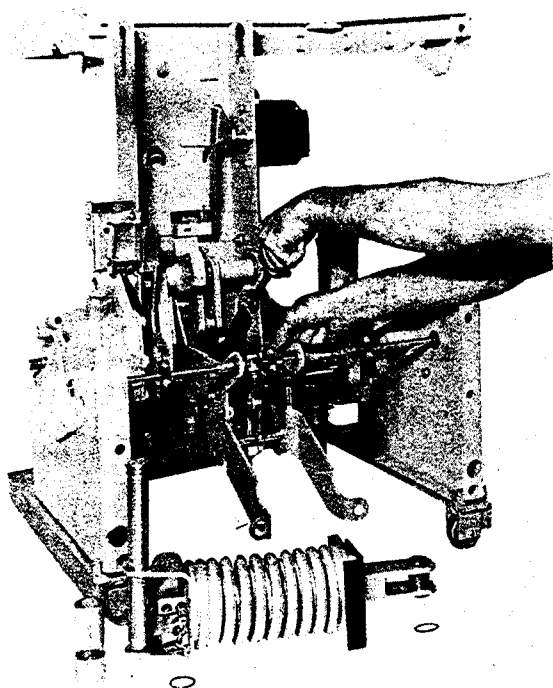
(8018989) Rear view of front frame-AK-50 showing cam shaft locking plate being loosened
